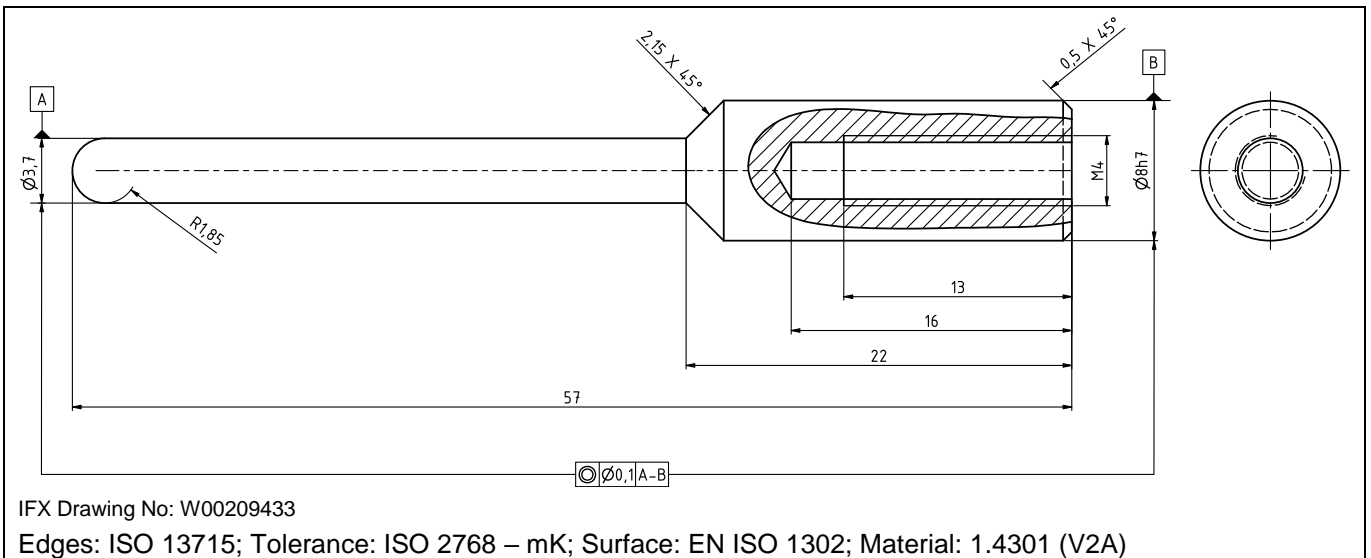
Technical drawing of the X/Y alignment domes of the sample press-tool (2 times for the top tool). The alignment domes can be fixed by metric M4x18 DIN7991 screws in the top tool.
